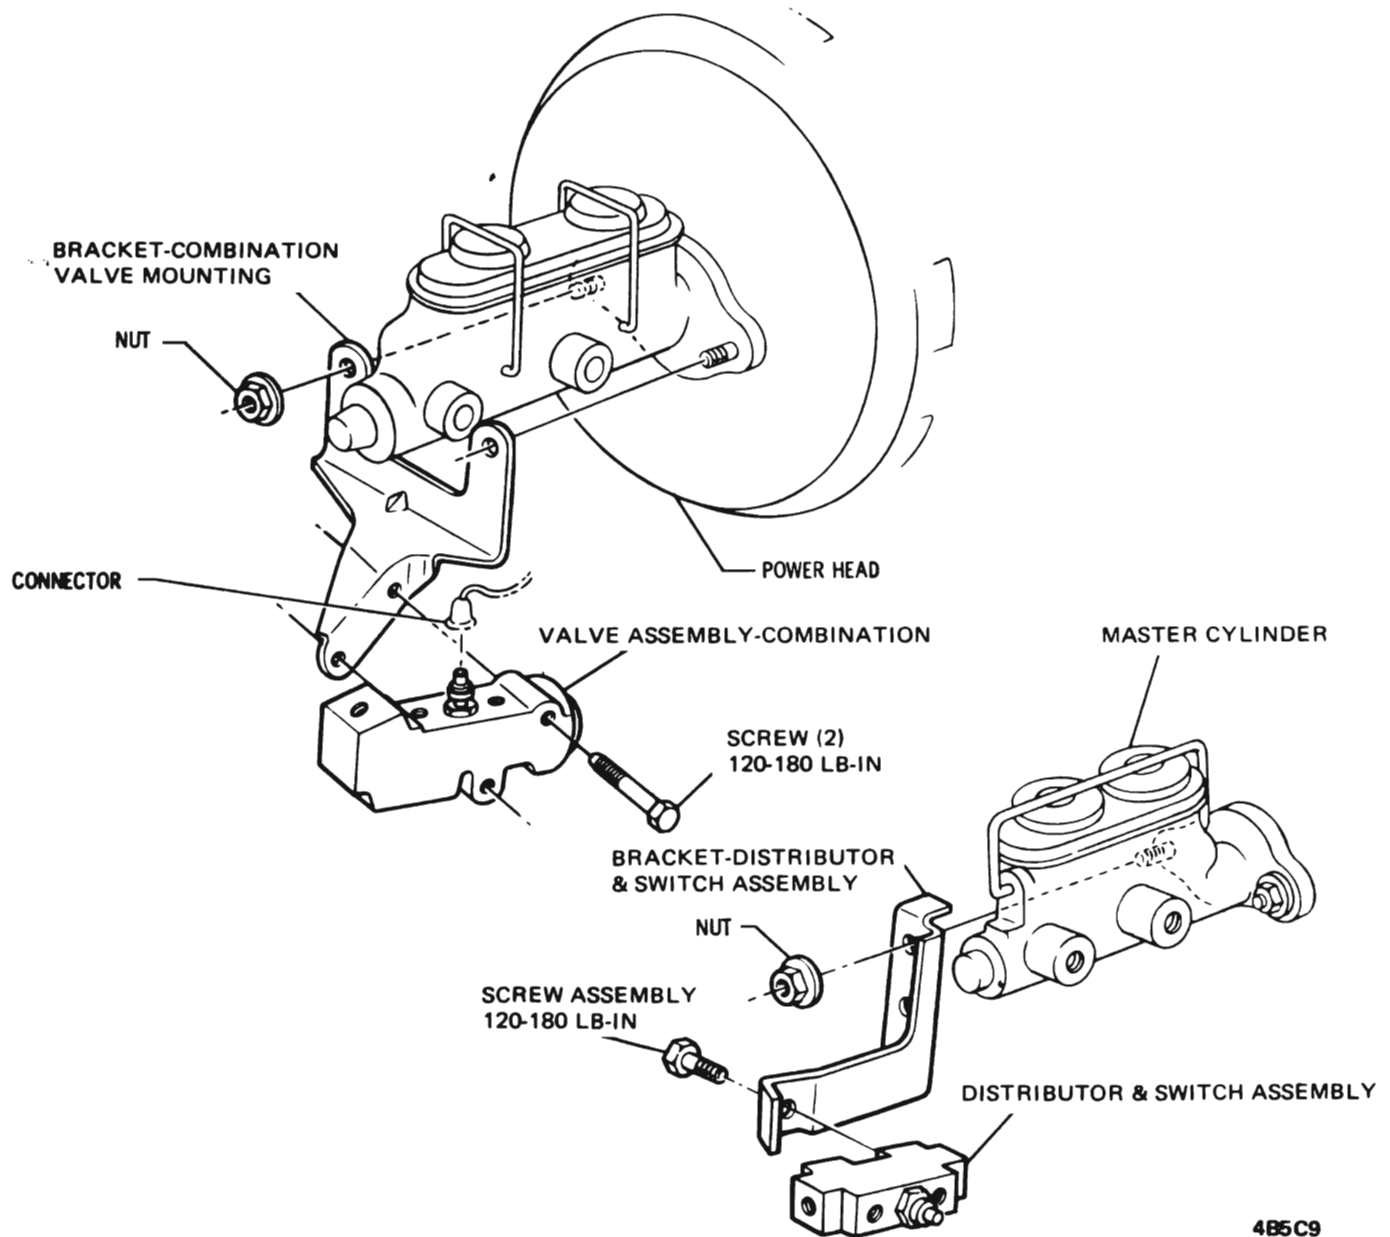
C-7 Master Cylinder Mounting - A Car Power Brakes
